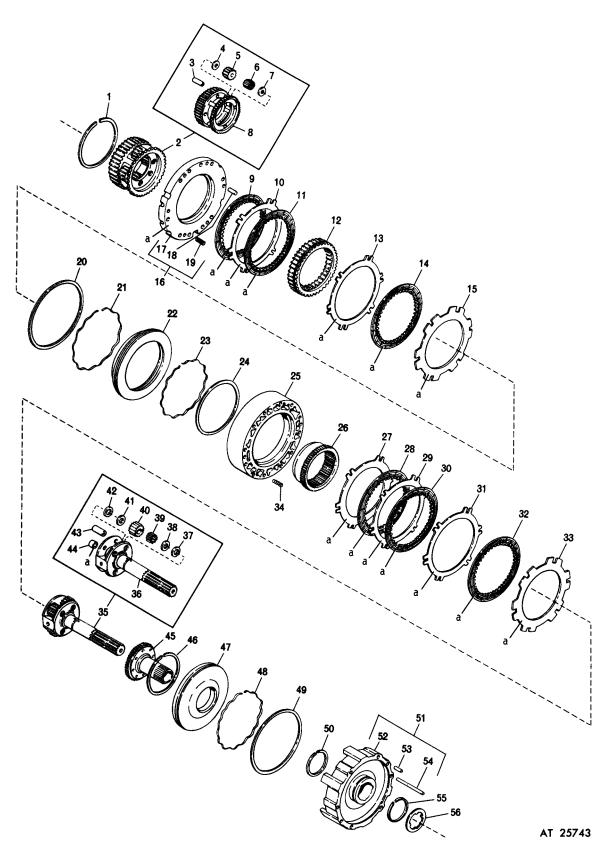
Intermediate, low-range clutches and planetaries-exploded view.
